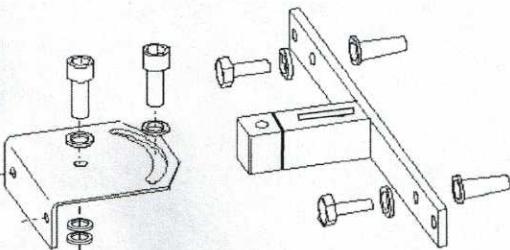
The distance L between wall and column can be adjusted within the limits 160-210 mm.
